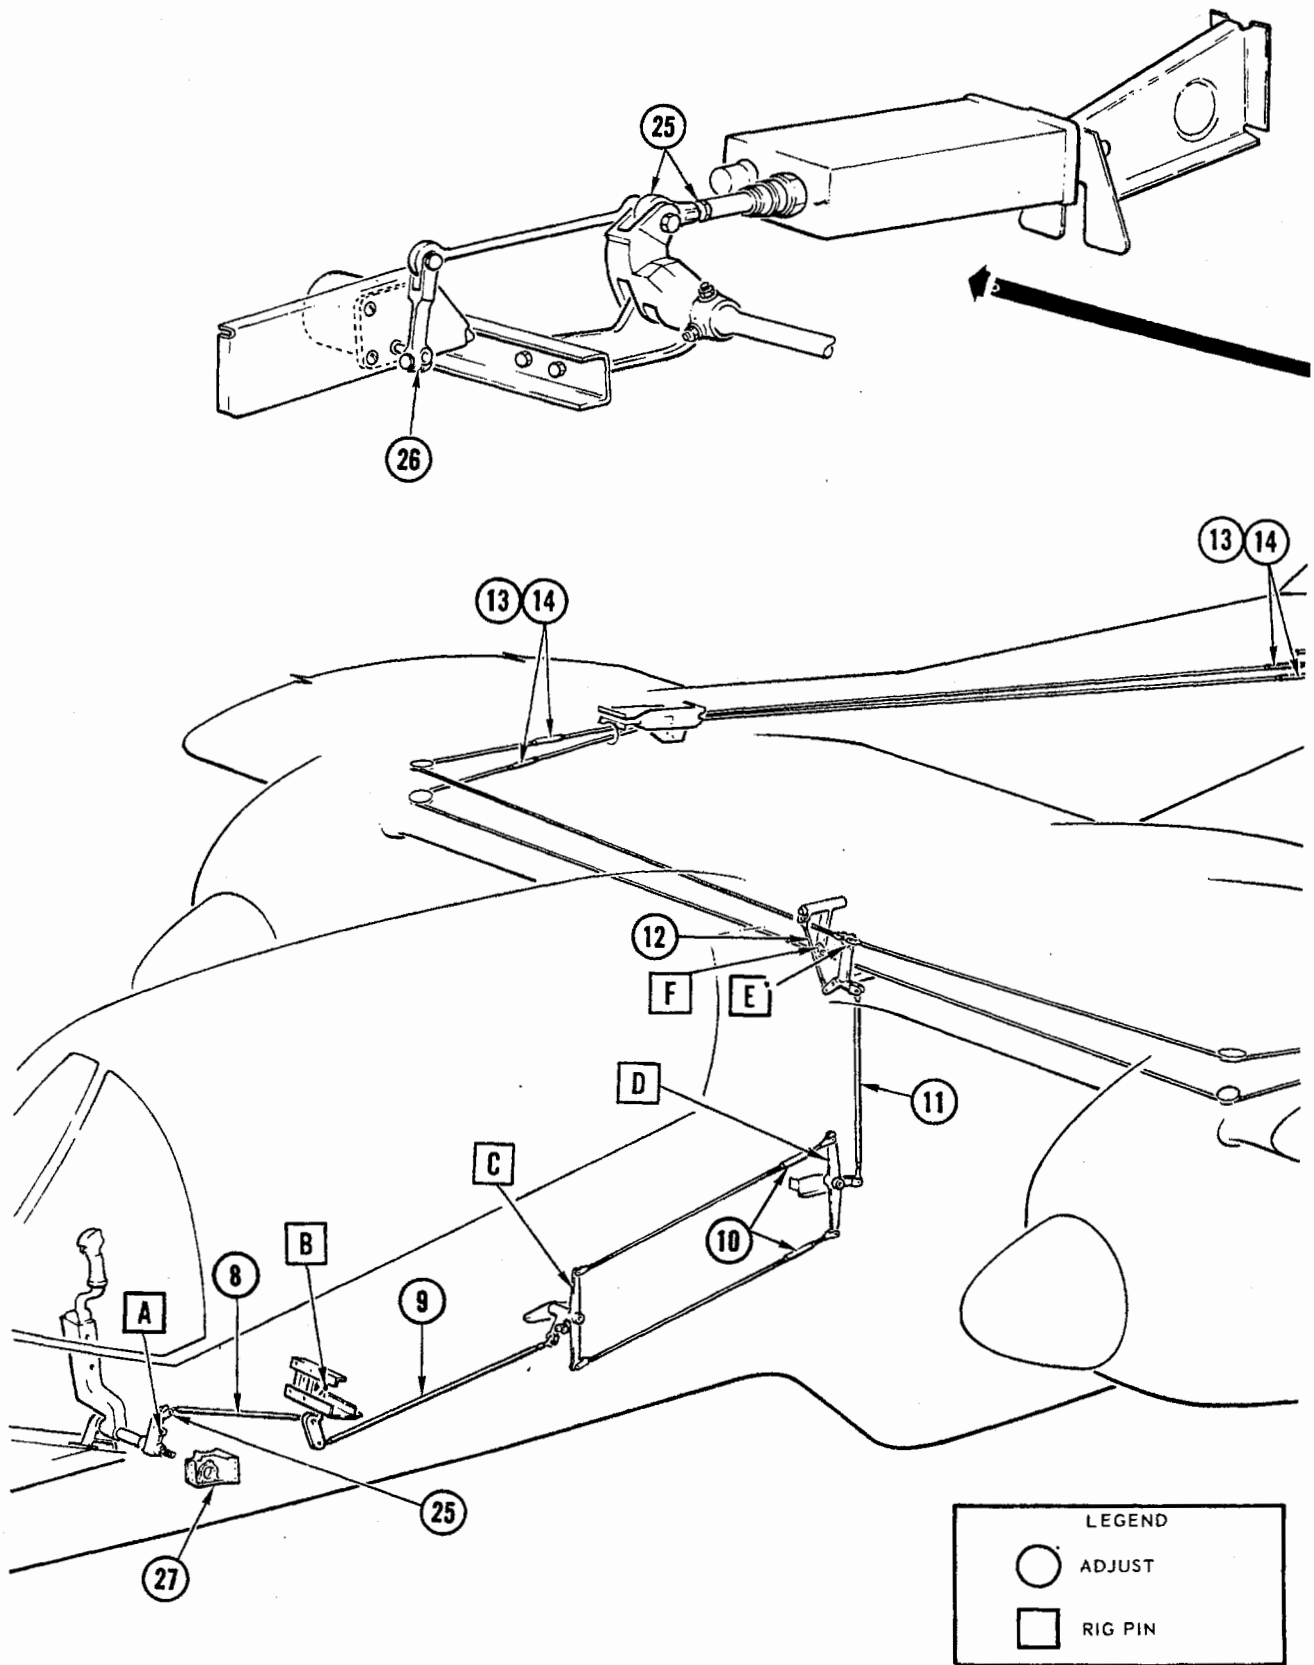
Rigging and Adjusting Longitudinal Control System (Sheet 1 of 2)
